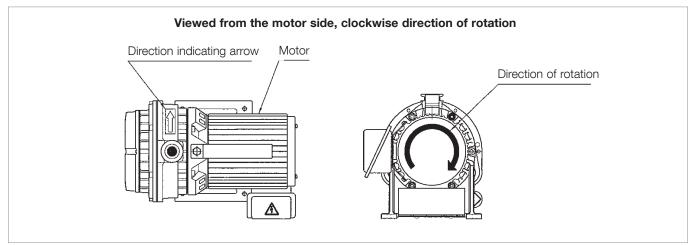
Checking the direction of rotation after having provided the wiring
